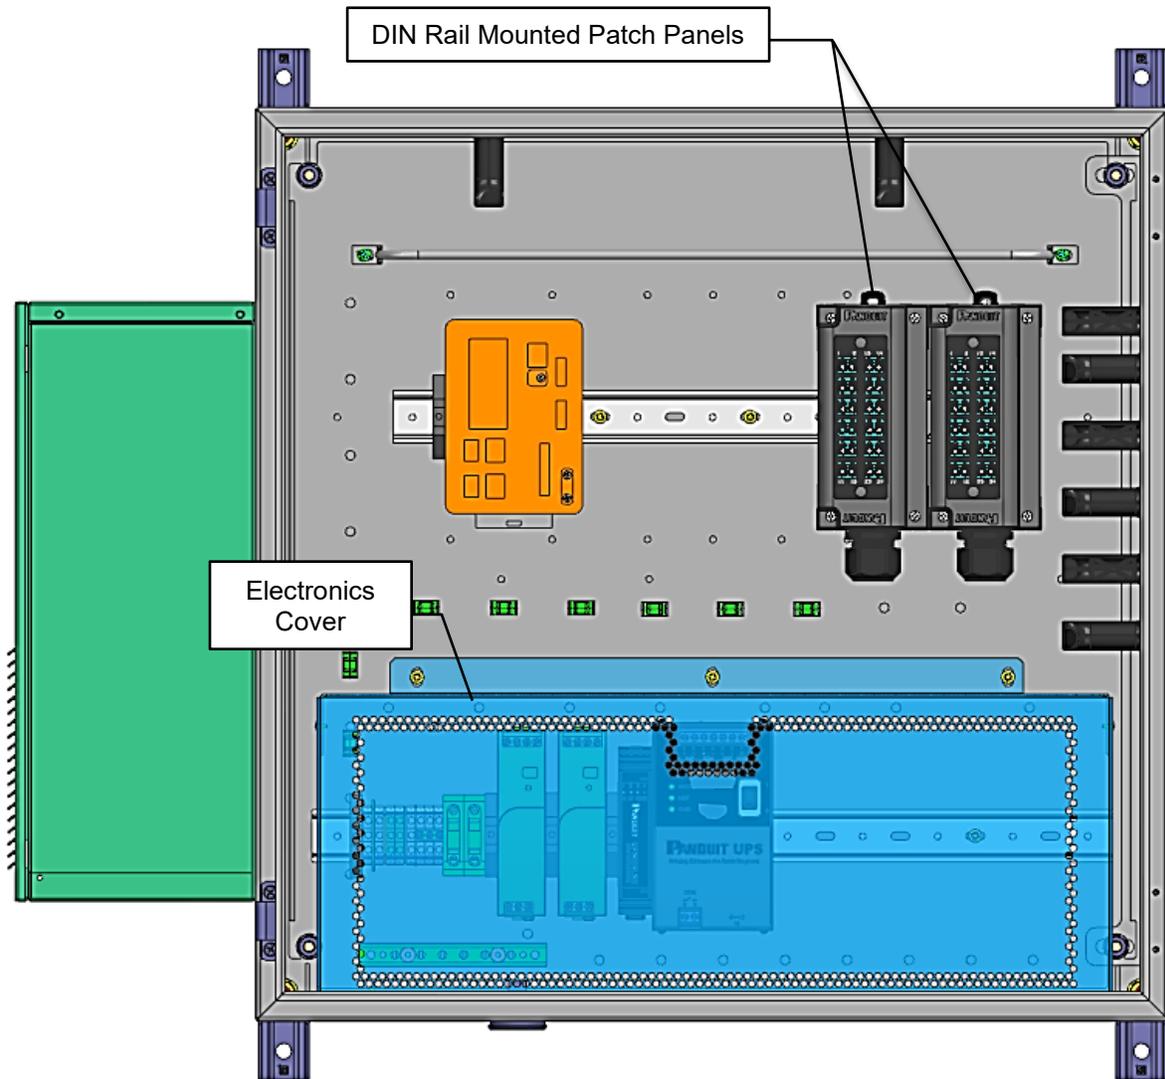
Front view of the Z22 Enclosure (front door removed for clarity).
